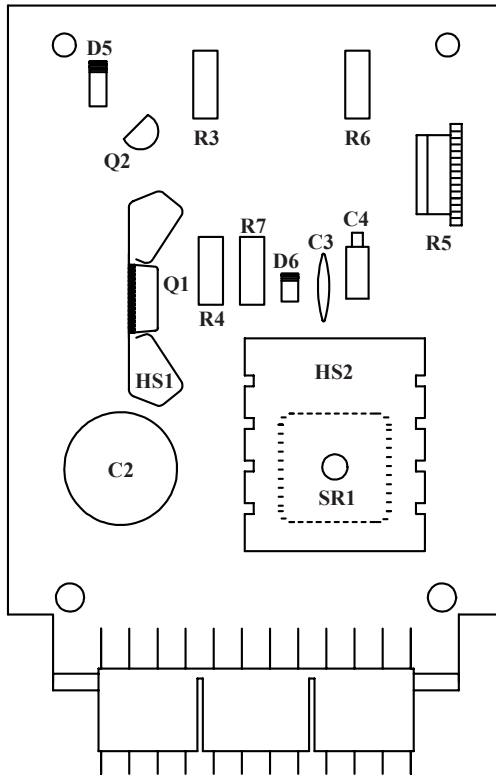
PRINTED CIRCUIT BOARD (SN-774U)
